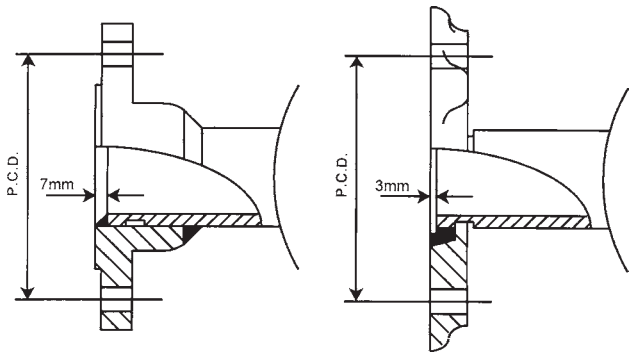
VICTAULIC - ADAPTER FLANGES
